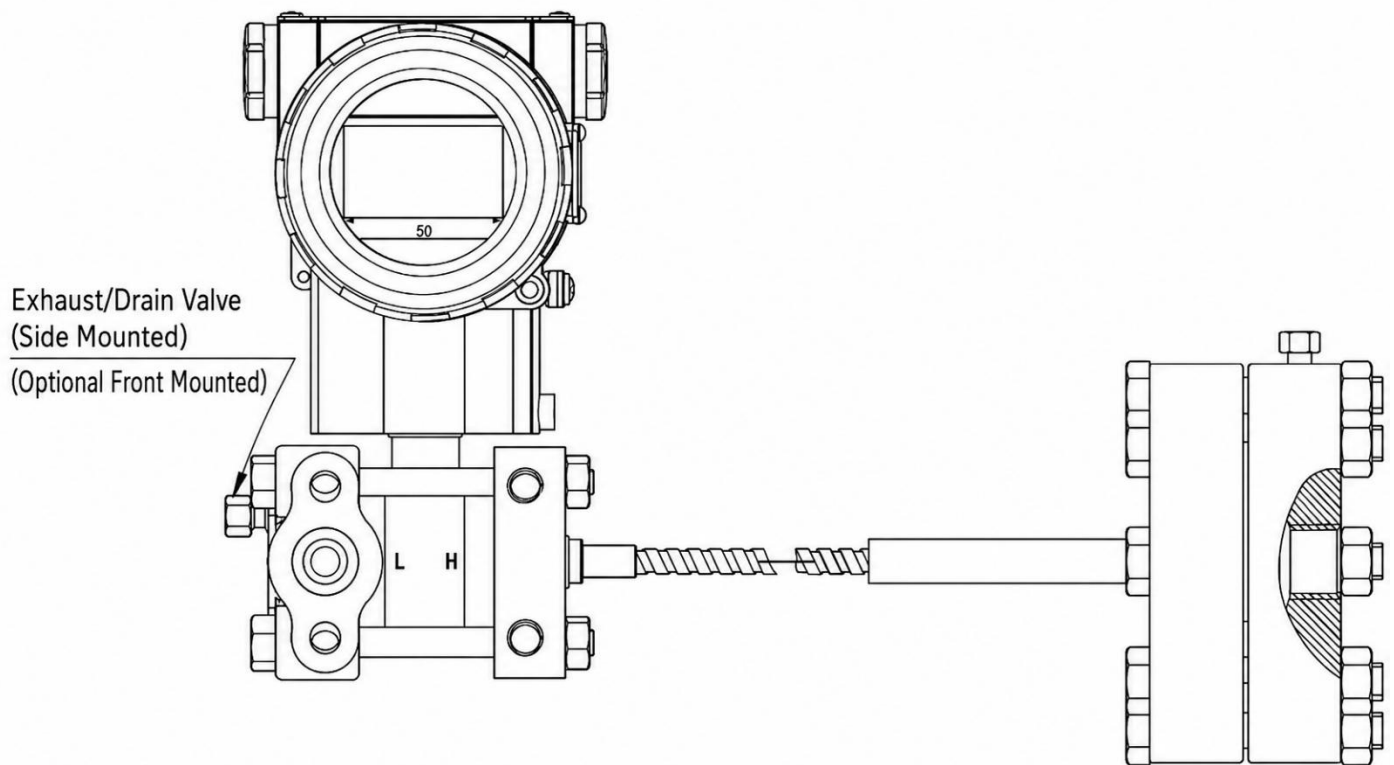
Single Remote Seal Arrangement (Thread-Mount) (units: mm)
